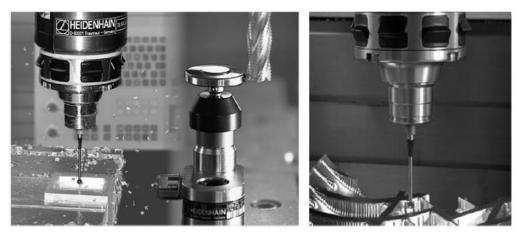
On-machine probing: Workpiece measuring between machining cycles and tool presetting
